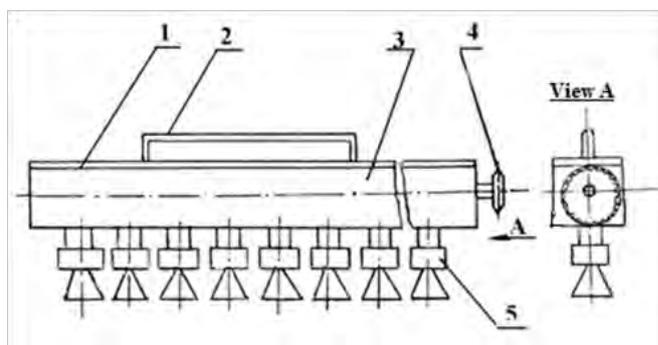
Wiring diagram sowing pipes with a splash cones to herbal or fertilizer machine: 1 – cover the sowing unit; 2 – handle; 3 – herbal or fertilizer machine; 4 – sprocket drive sowing coils; 5 – seed tube with a splash cone
